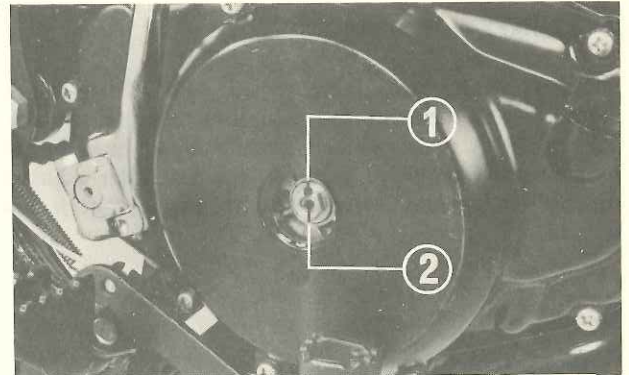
(1) Lock nut (2) Clutch adjuster
